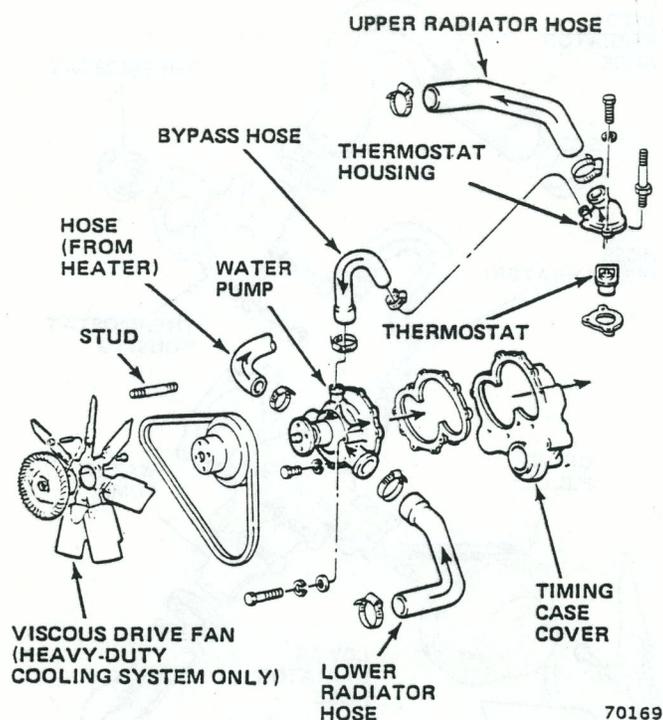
C-3 Eight-Cylinder Engine Cooling System Components
